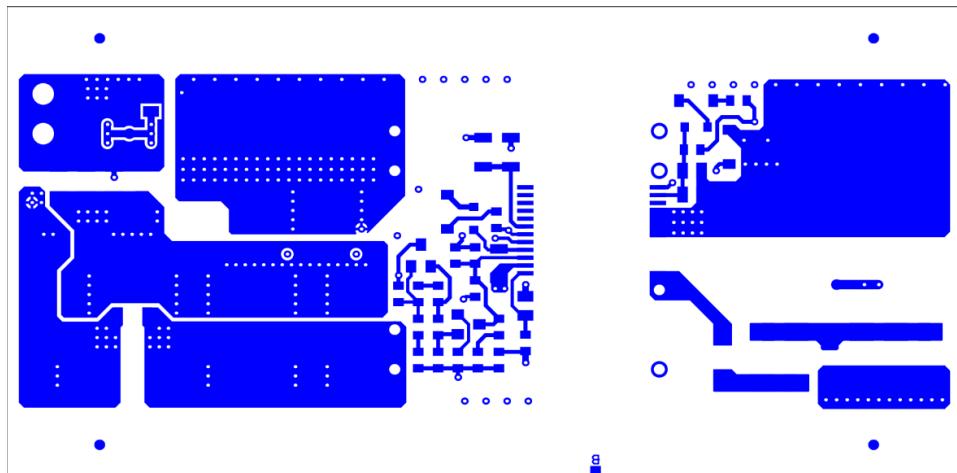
DER-1035Q Bottom Layer PCB Layout.
